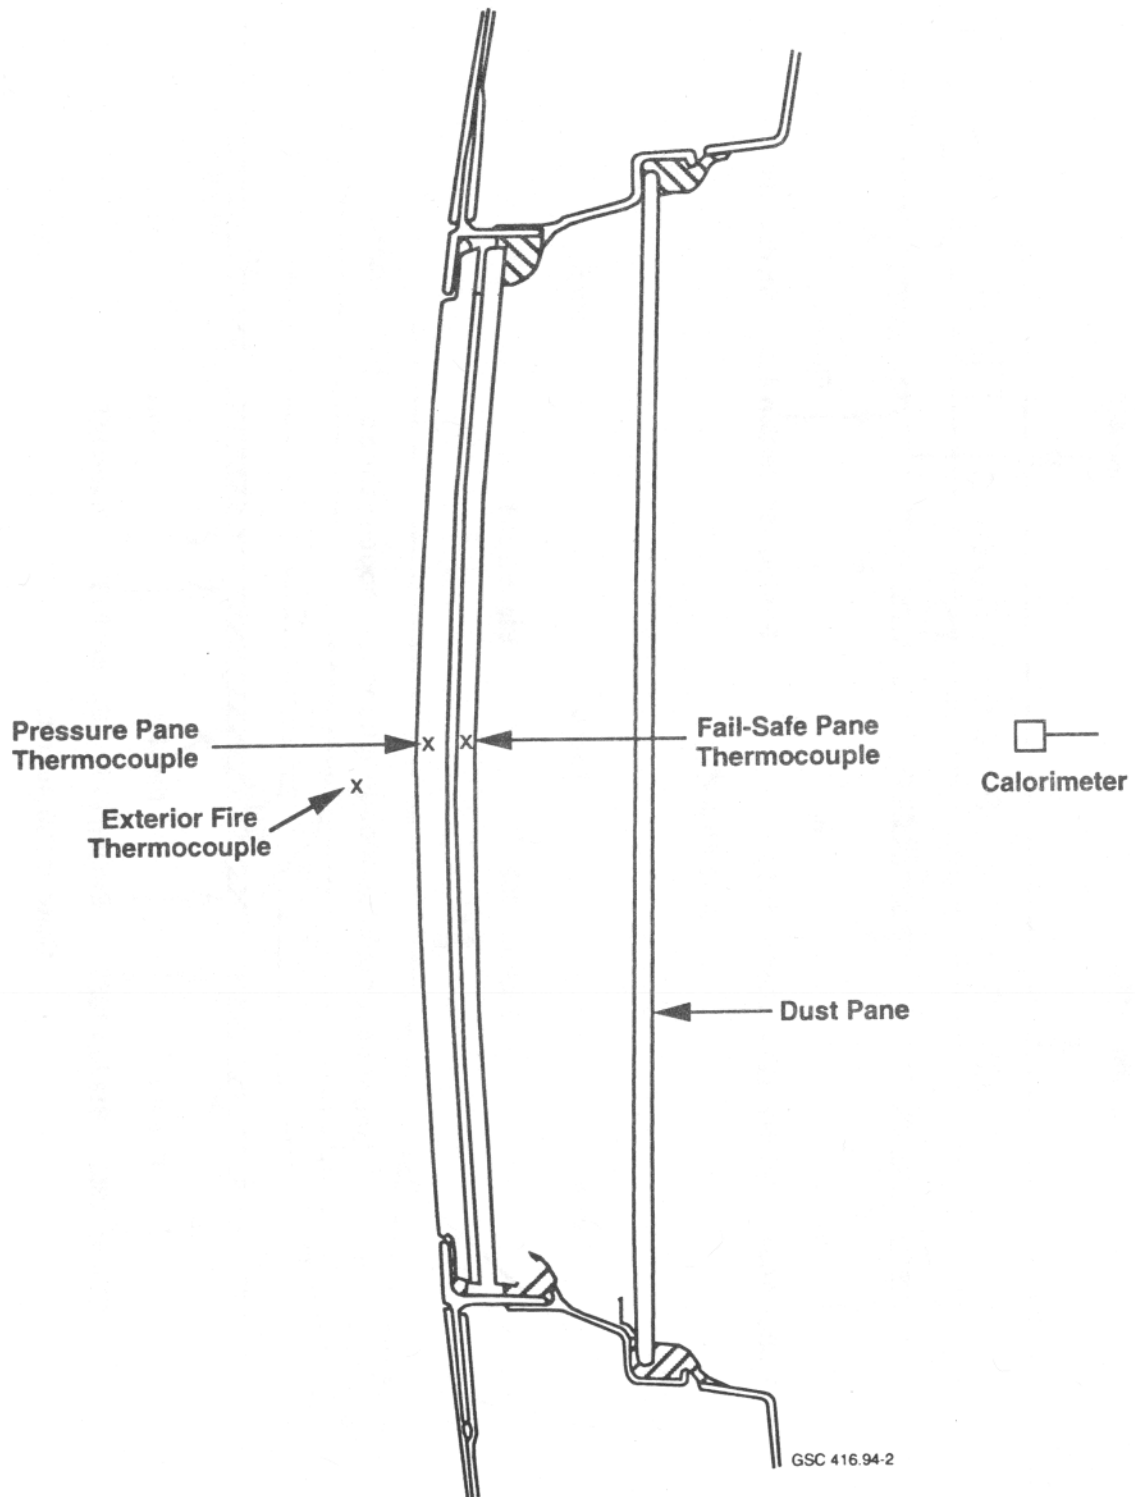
TYPICAL WINDOW INSTRUMENT
